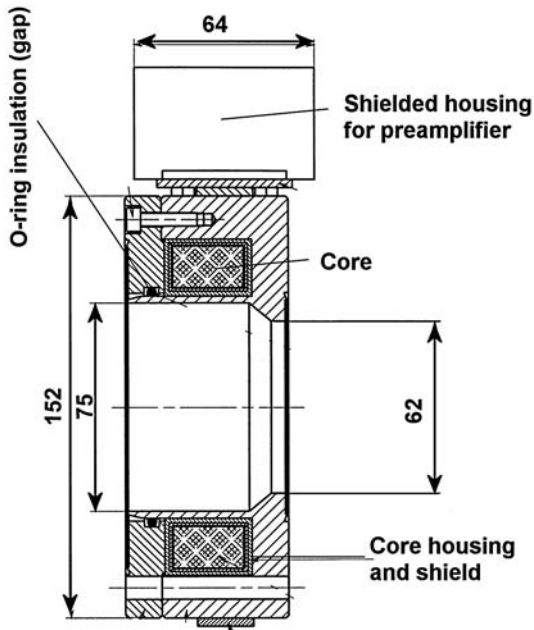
Construction drawing of a beam transformer using an O-ring insulator as the isolating gap. All dimensions in millimeters
